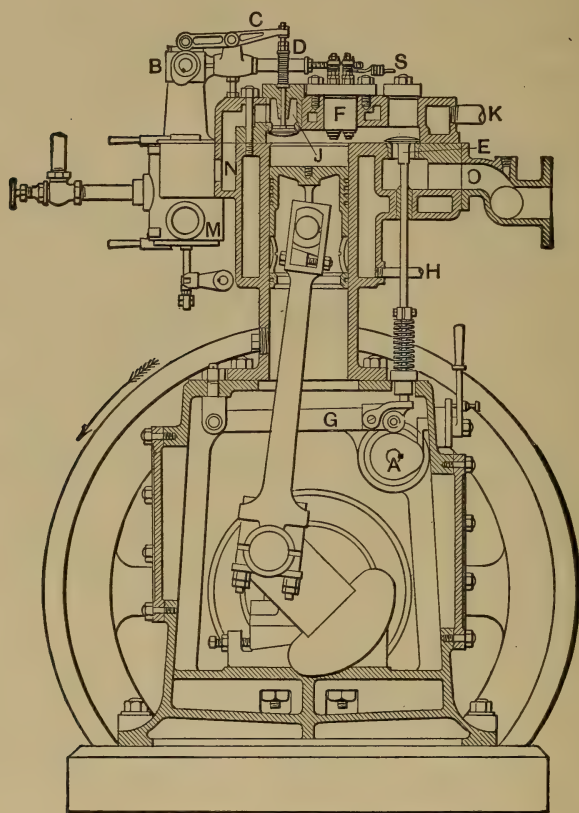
SECTION THROUGH WESTINGHOUSE ENGINE.
